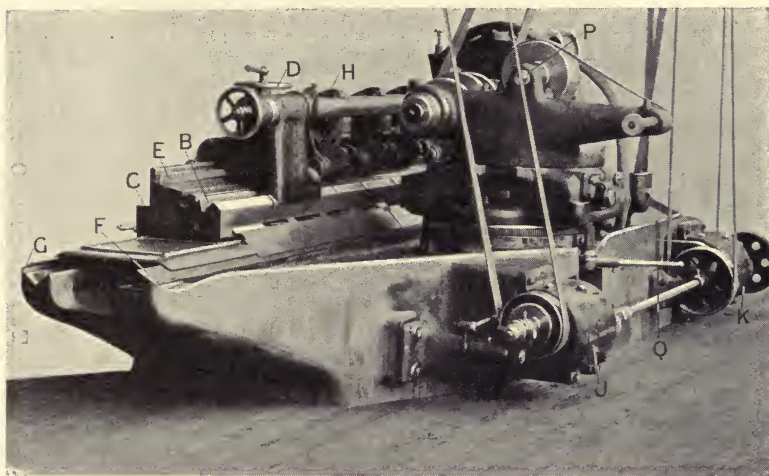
HERBERT UNIVERSAL GRINDER, 24"  $\times$  12' 0"
